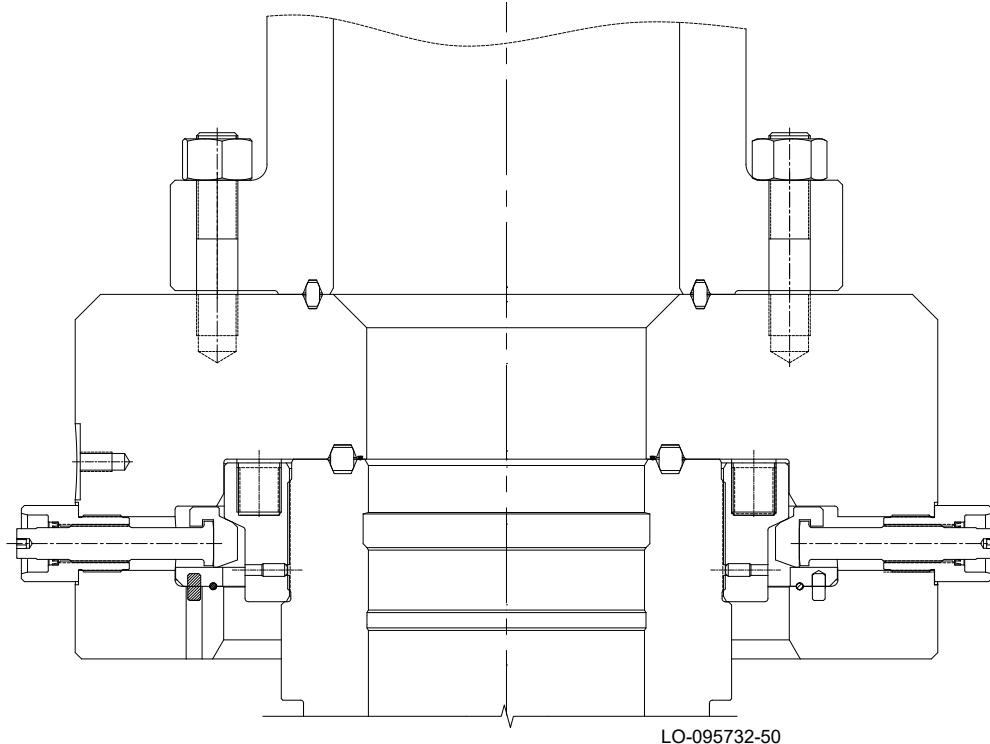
Drilling Adapter Installed on the Casing Head Housing
